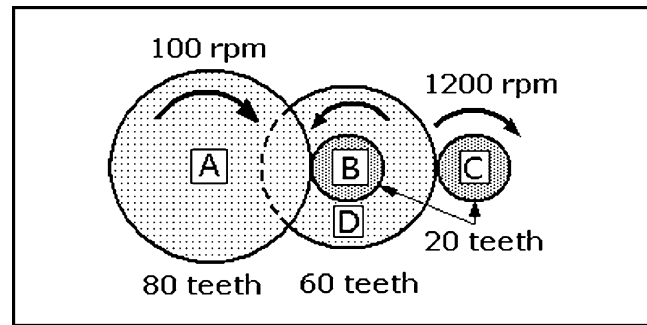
Compound gears: Two gears B and D are mounted on a central shaft and they turn at the same speed. If gear A rotates at 100 rpm clockwise, gears B and D turn counterclockwise at 400 rpm, and gear C, driven by gear D, turns clockwise at 1200 rpm.
